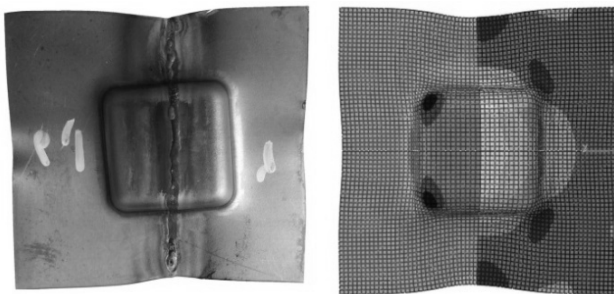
Simulation and experimental results of weld-line movement for the one piece blank holder
